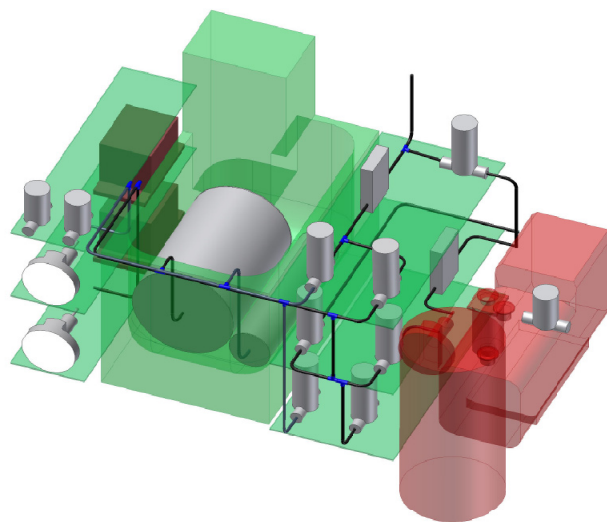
Three dimensional study of the metering panel layout in order to minimize the size of the ‘dead volumes’ making it possible to be assembled and welded together. In semi-transparent green the support structure and the thermostatic bath. In red, the small  $^3\text{He}$  pump required for the stepping/ramping down the gas density in the cold bore and the  $\text{LN}_2$  trap for purifying the gas in case of contamination with pump oil. In grey and black the volumes, valves and the pipework on brown the metrology grade Baratron® pressure sensors.
